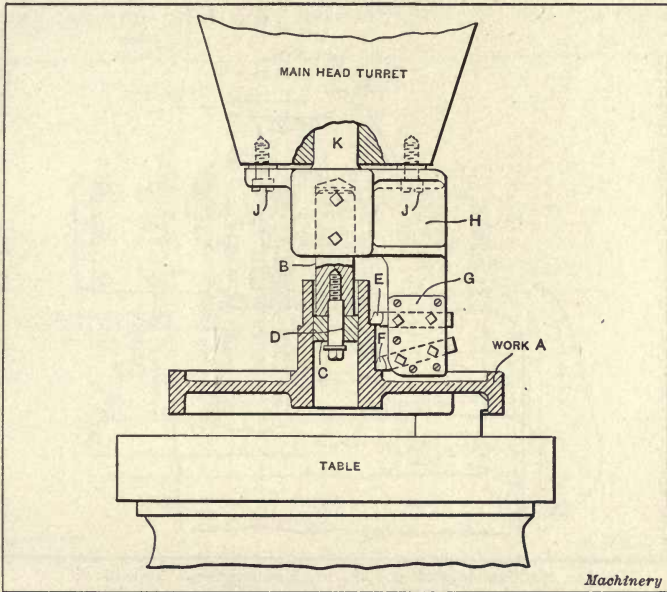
Multiple Turning Tool for Vertical Turret Lathe
